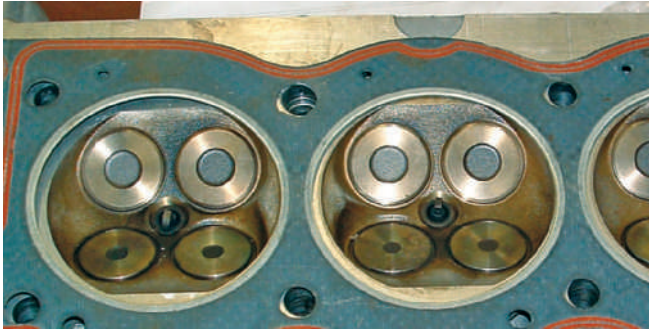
A cylinder head with pentroof combustion chambers.
